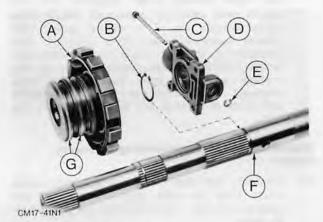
Output shaft with governor and governor hub E - Spring clip
